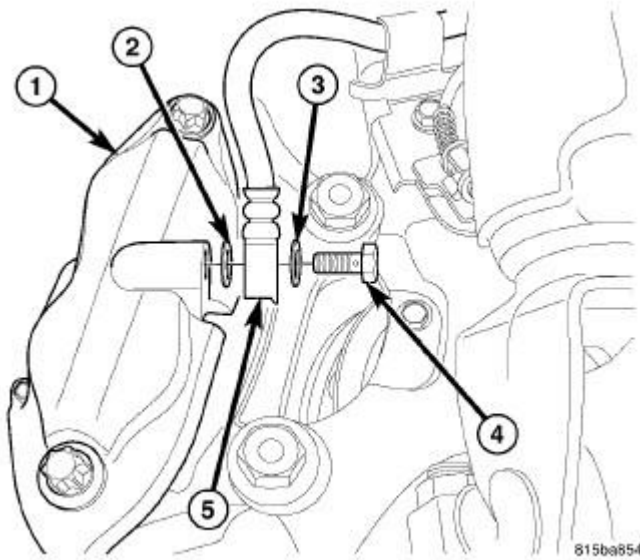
FLEX HOSE CONNECTION AT CALIPER
